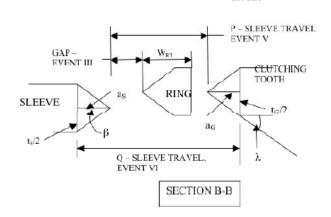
Distance P, Sleeve Tooth Pointing to Clutching Tooth Pointing
